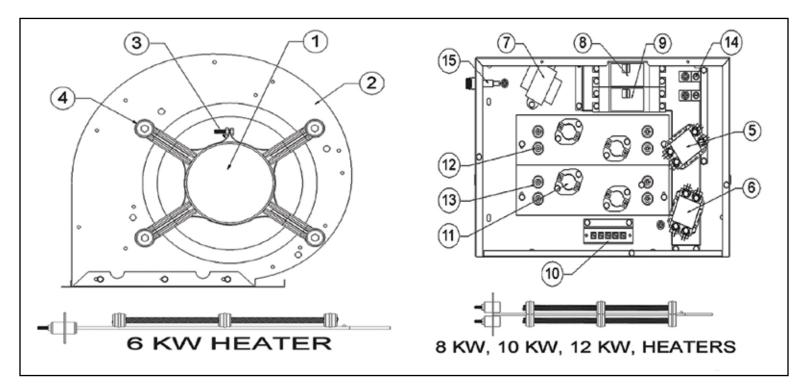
Replacement Parts Item Identification for Electric Heat Models with a 1/2 HP Constant Torque Blower Motor
